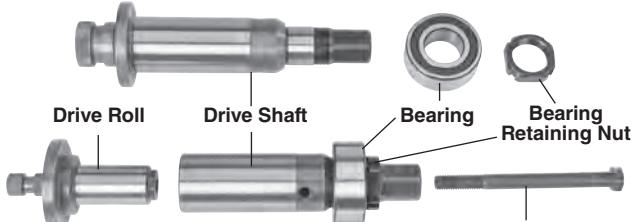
One Piece Drive Shaft (Top), Two Piece Drive Shaft (Bottom)
